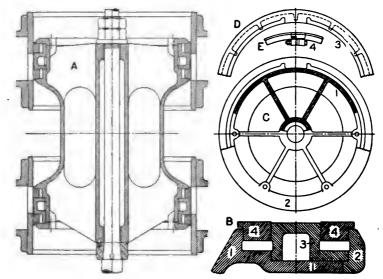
Large Piston-valve, of the Best Marine-engine Type.
